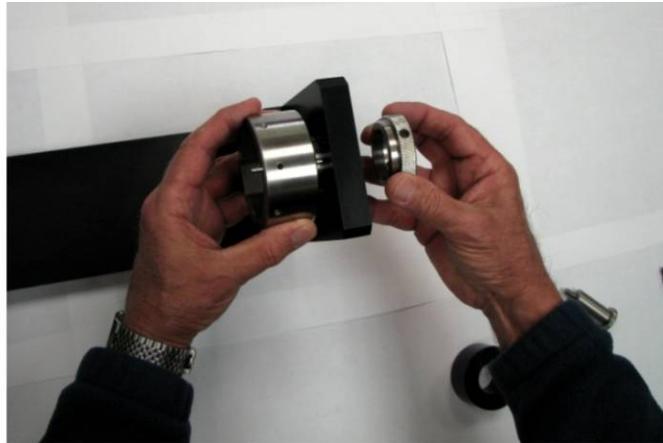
A-808 Calibration Fixture with X-Y Target Stage for T-218/219 Targets and L-705/706 Laser Mount
